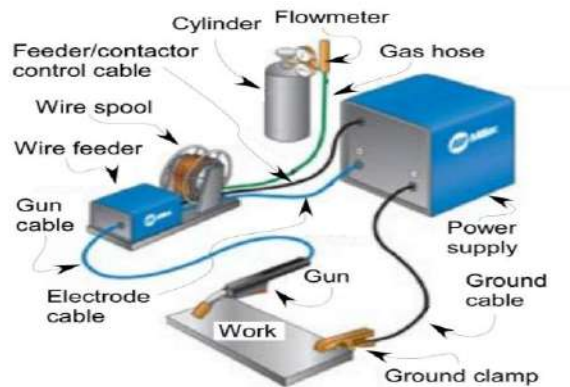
Gas metal arc welding (GMAW) process (source: [12]).
